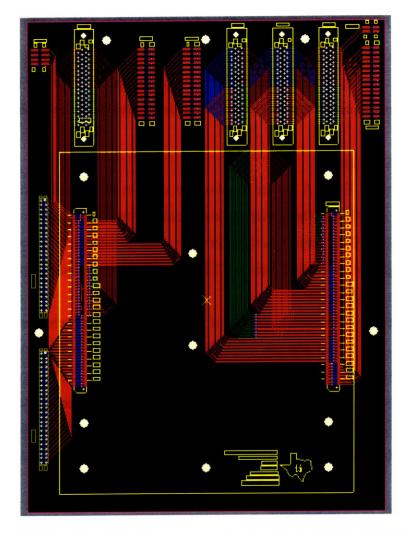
A PCB drawing of the Resource Interface board showing the connectors and signal traces.
